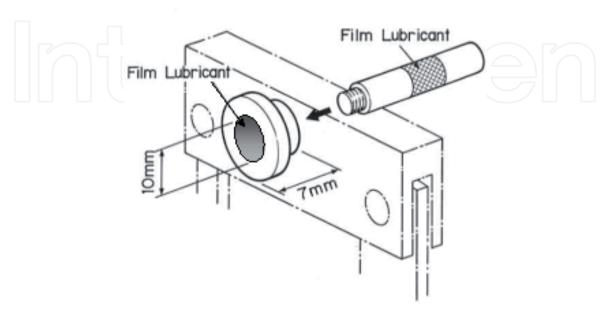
Friction measurement part of the in-vacuum journal bearing test equipment.
